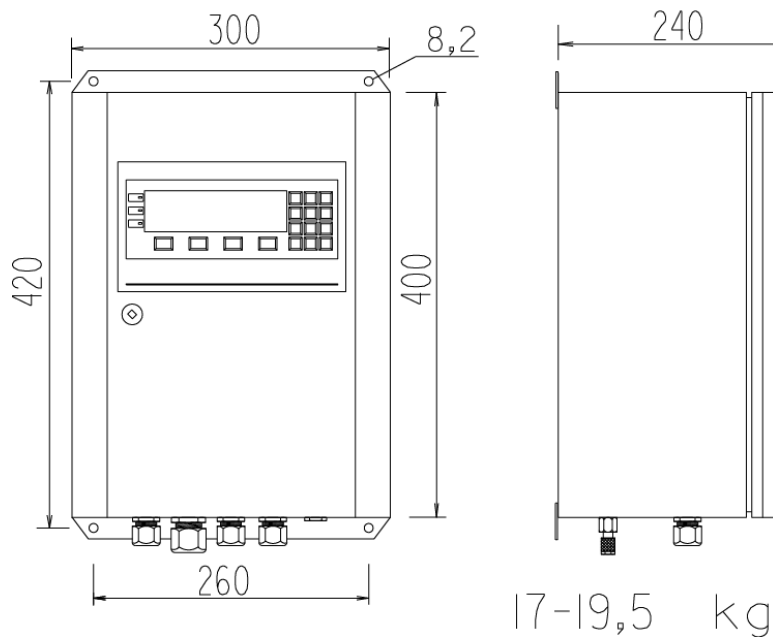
Dimensions (mm) of the electronic unit SME-53
